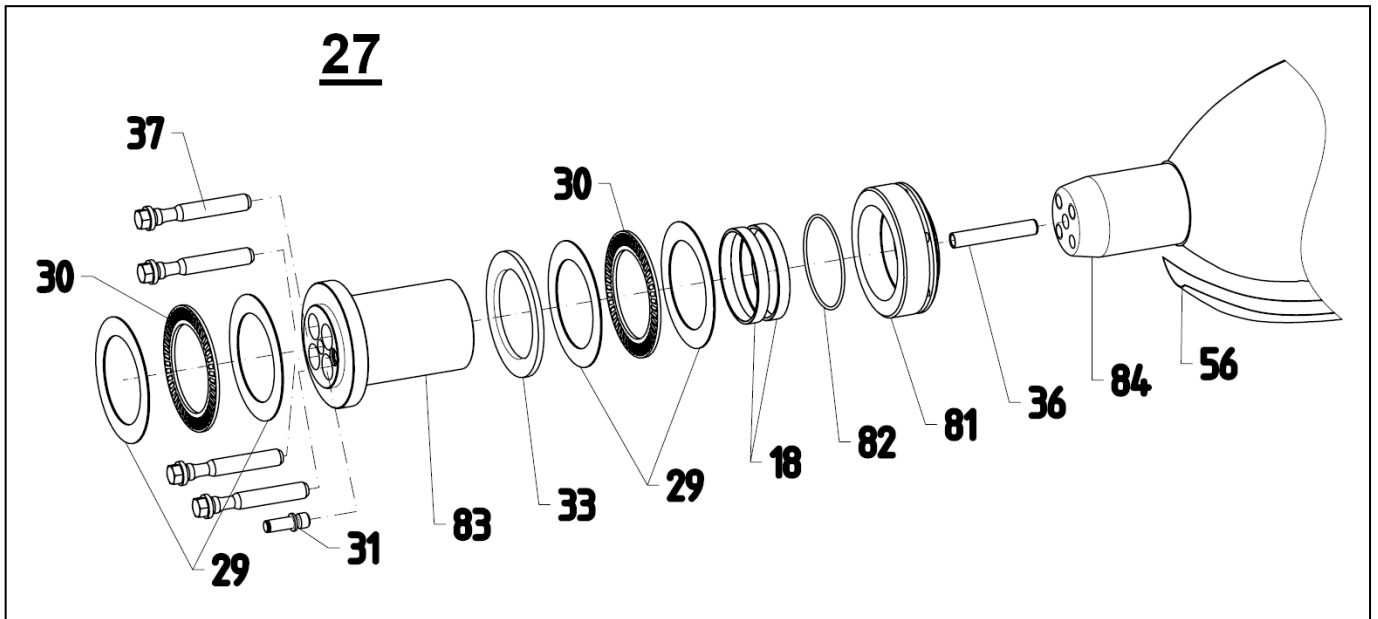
Propeller Assembly Part 6 - blade B, WA.
